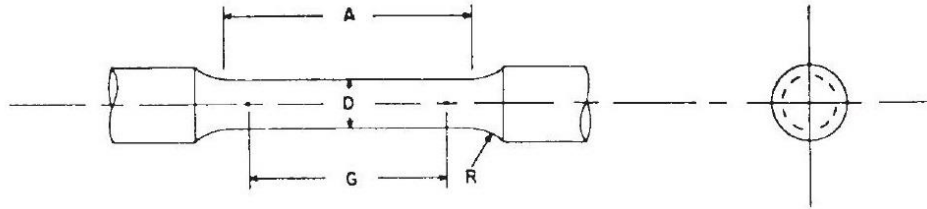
Tensile test specimen (A- length of narrow section, D-Diameter, G-Gauge length, R- Fillet radius).
